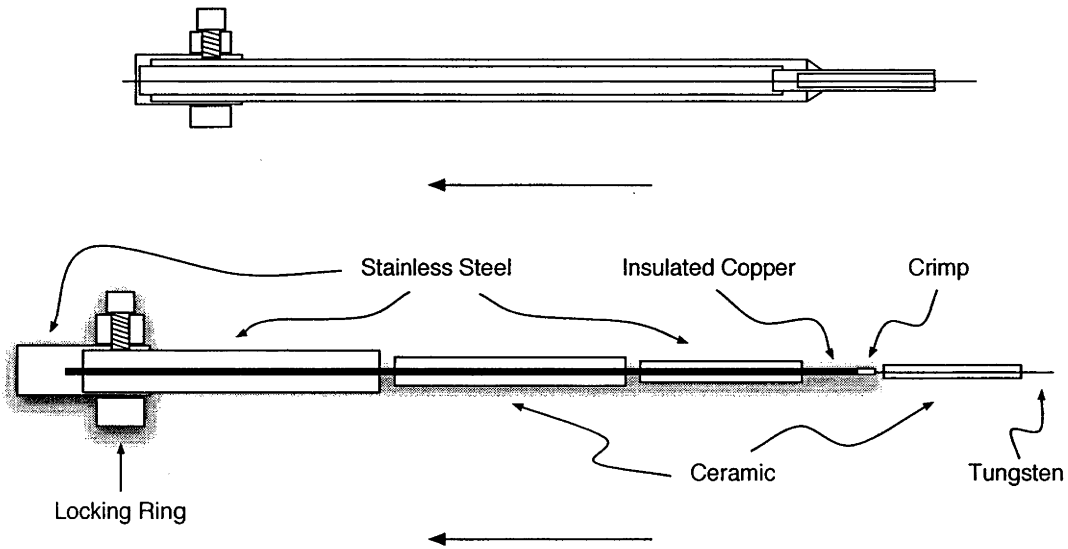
Sectional and exploded view of Langmuir probe assembly used on WOMBAT.
